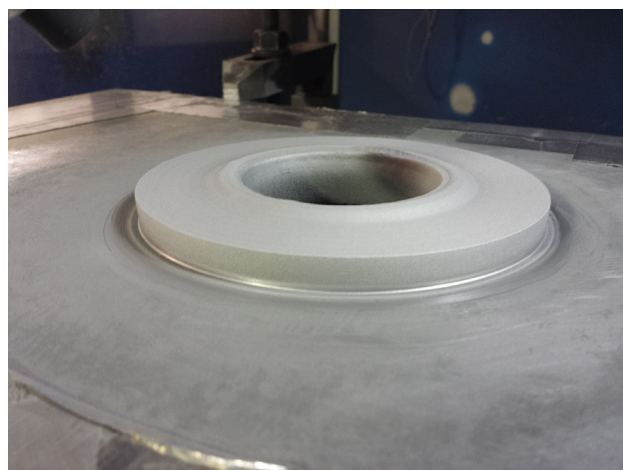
Repaired external corrosion surfaces of the aluminum actuator post deposition
